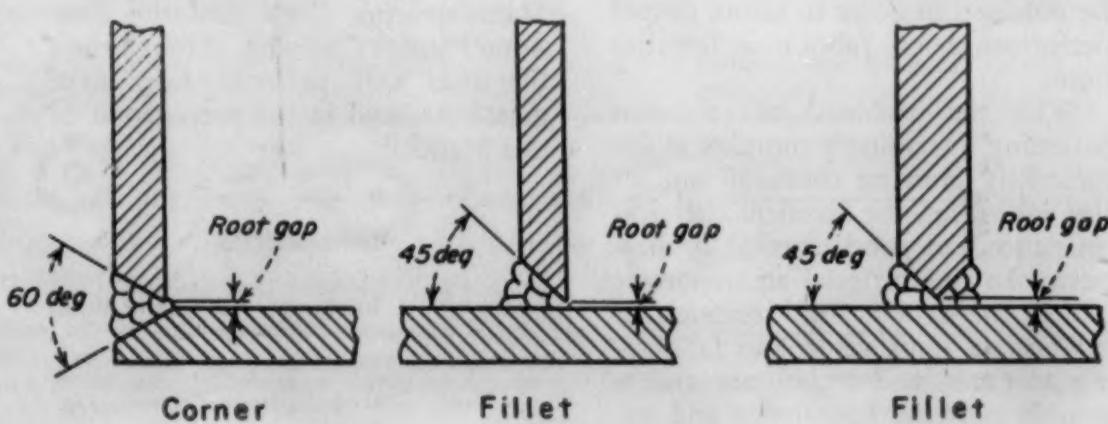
Fit-up of corner and fillet joints for hot-gas welding.
